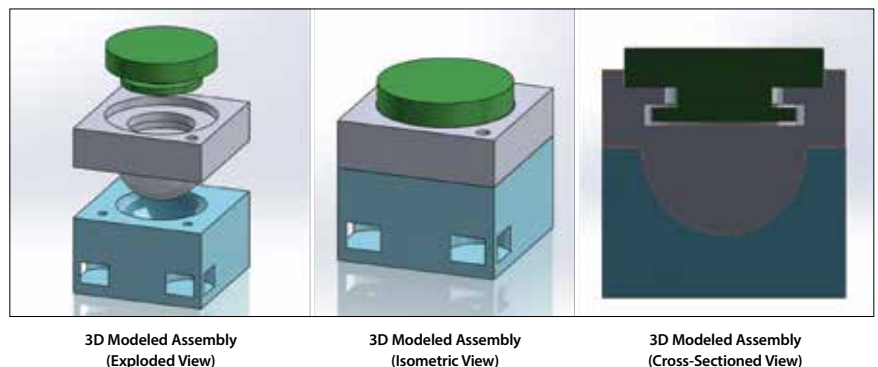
3D modeled assembly views generated using 3D CAD software.
